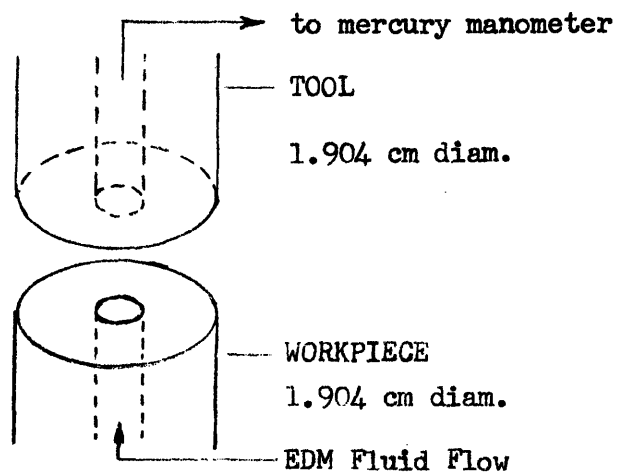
Geometry of tool and workpiece used in the measurement of interelectrode distance.
